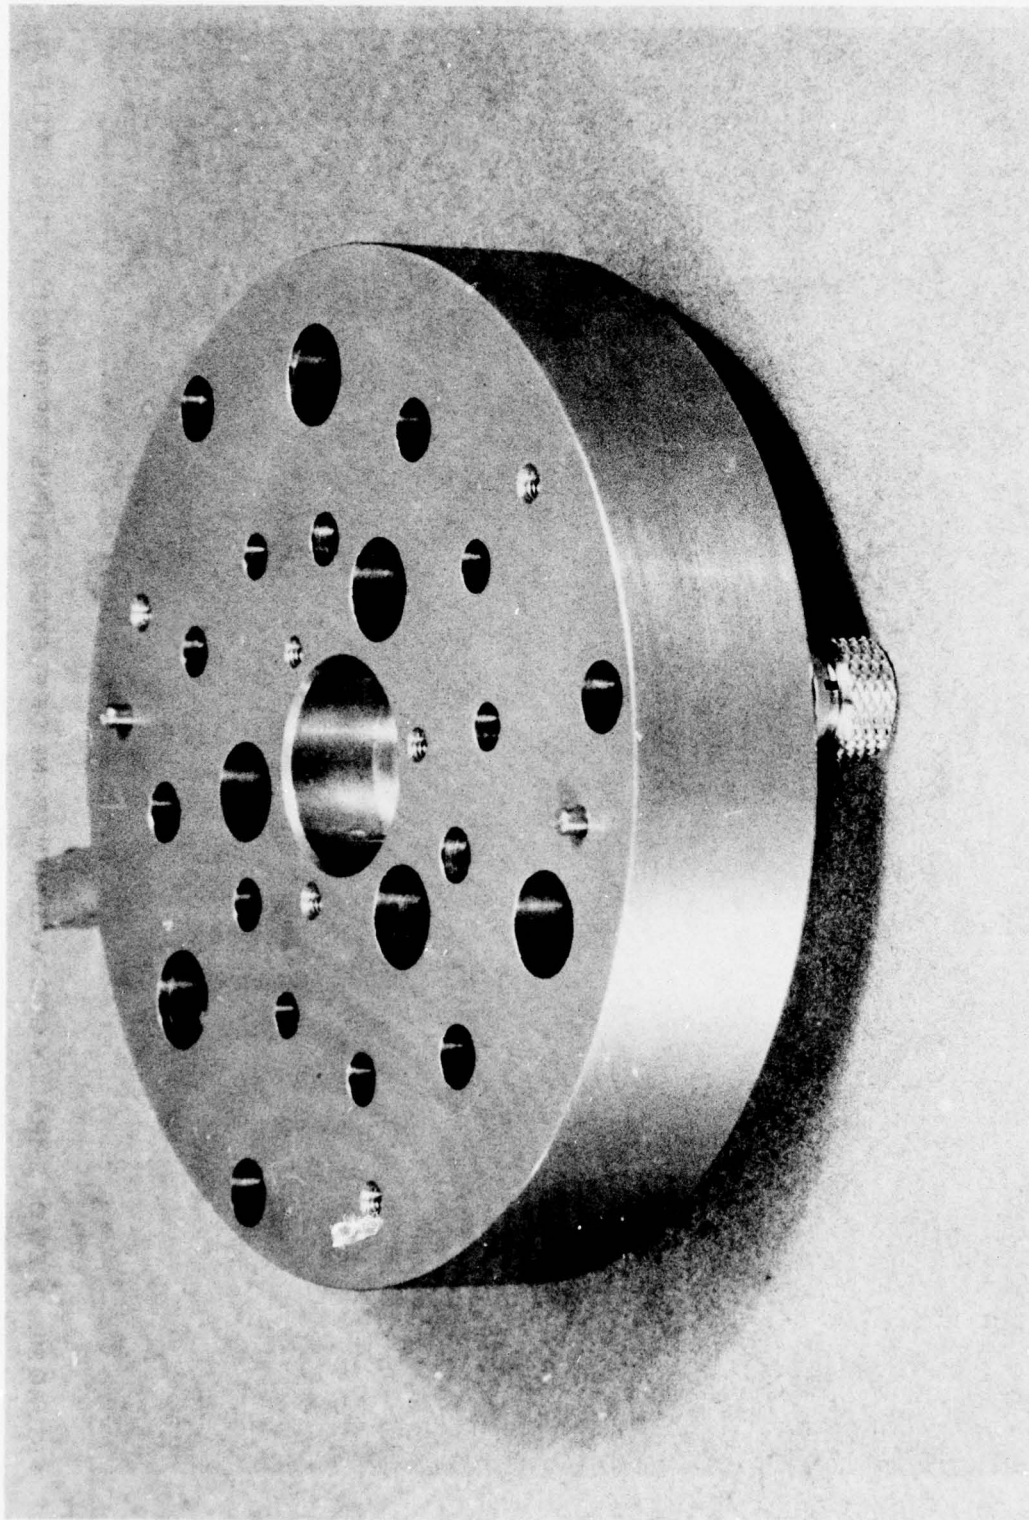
VIEW OF SUPPORT PLATE OF FLEXIBLE THRUST BEARING LLF-1T-HOLE PERIMETERS SUPPORT THE SPRING PLATES AND DETERMINE THE LOCAL STIFFNESS
